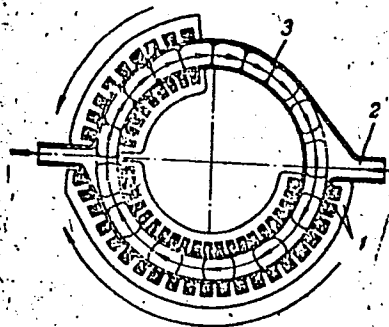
Hermetically sealed piston pump. 1— Braking inductor; 2— conduit; 3— piston; 4— bushing
